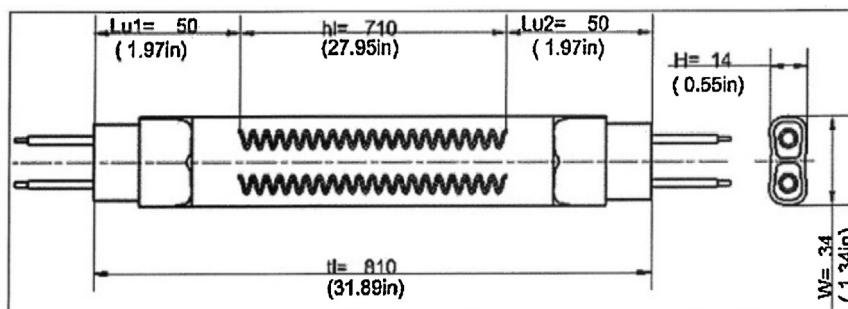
Drawing of the heater, which is actually made of two filaments in two tubes merged together to a single more stable tube.
